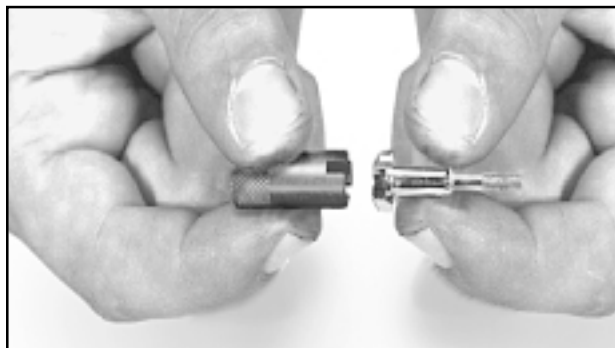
Press the head of the inlet valve (59) into the castle wrench
